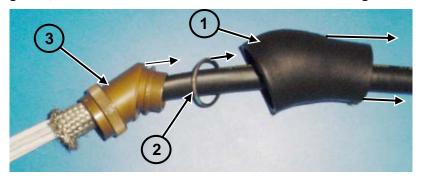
Installing the Molded Boot, Tinel-Lock Ring, and Backshell
